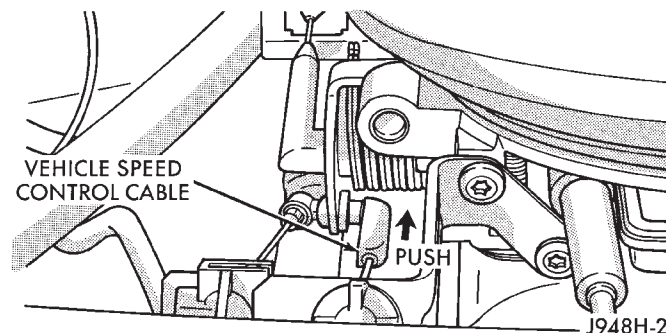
Cable at Bell Crank—5.2L V-8 Engine
